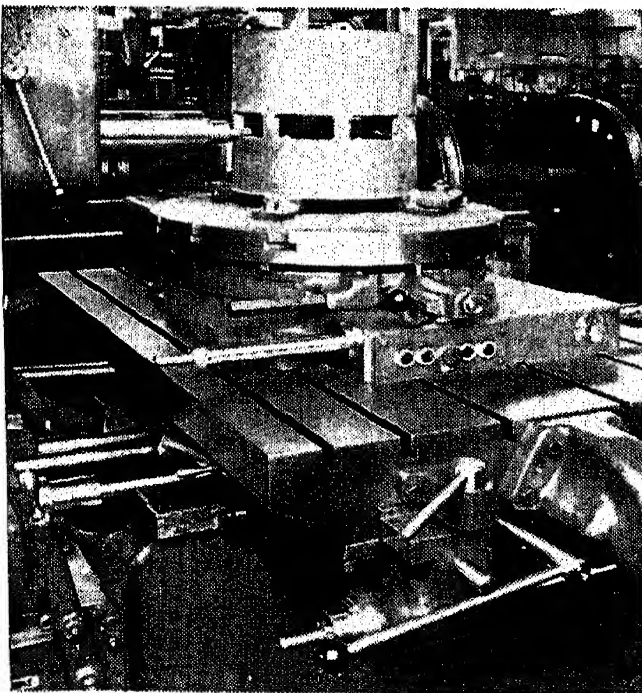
Windows being end milled in a casting mounted on a power operated circular rotary table on a 3 in. table-type horizontal boring, drilling, and milling machine. (Courtesy Lucas Machine Div., The New Britain Machine Co.)
